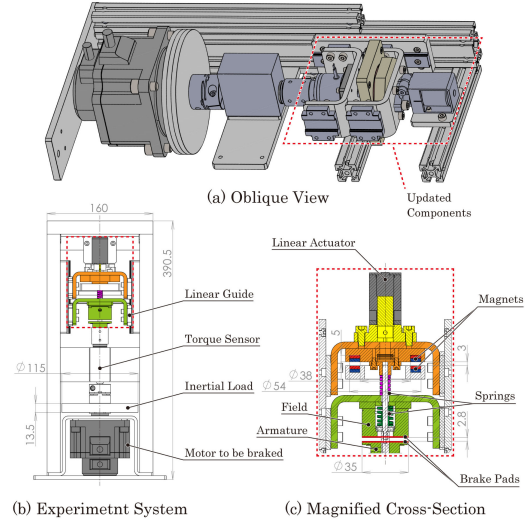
Design sketch of the 2nd prototype of the IBM brake.
